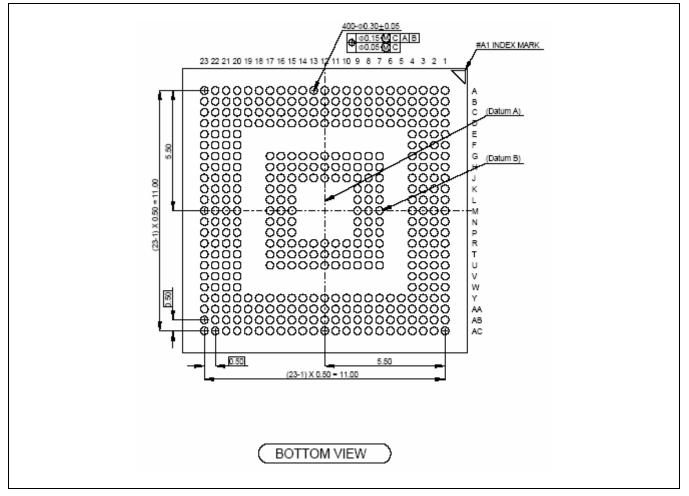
400-FBGA-1313 Package Dimension 2 (Bottom View)
